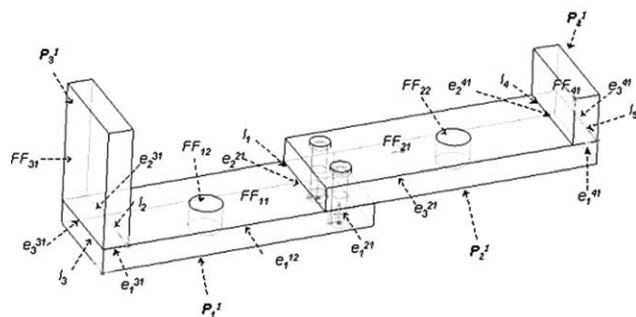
Connector assembly with two welded joints and one pin joint.
